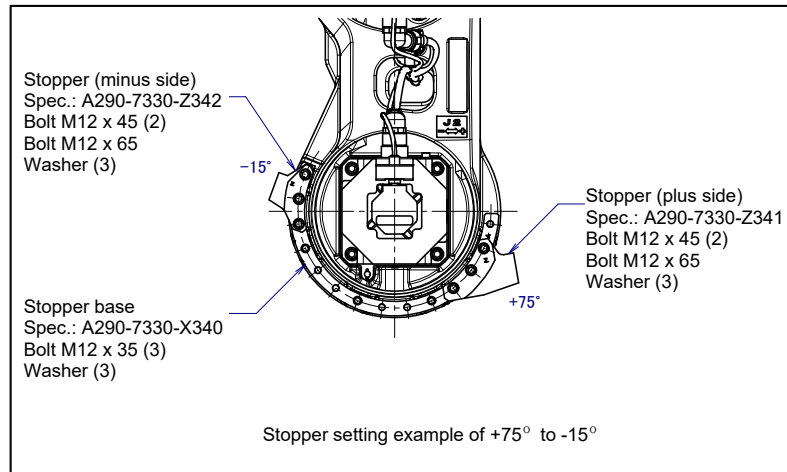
(i) Setting example of J2-axis adjustable mechanical stopper (R-1000iA/120F-7B)
